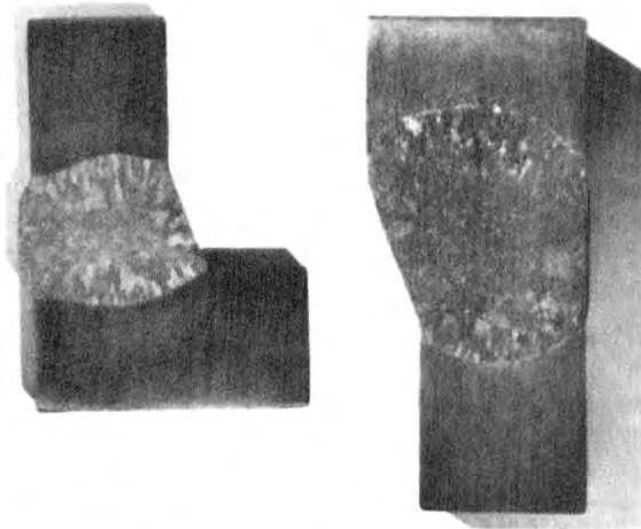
Examples of joints and welds made with the electroslag process.
